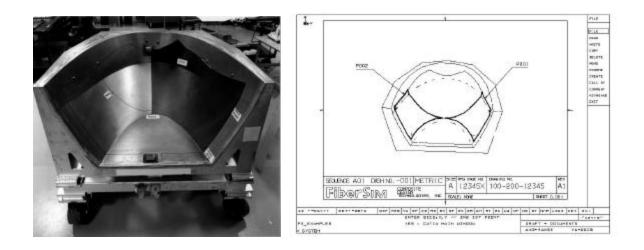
Actual composite part mold and plies, and corresponding CAD drawing.
